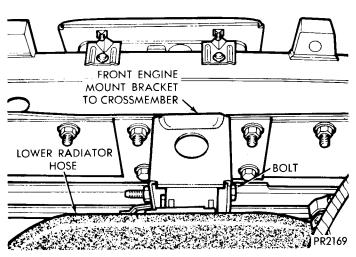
Remove or Install Engine Mount Bracket from Front Crossmember
